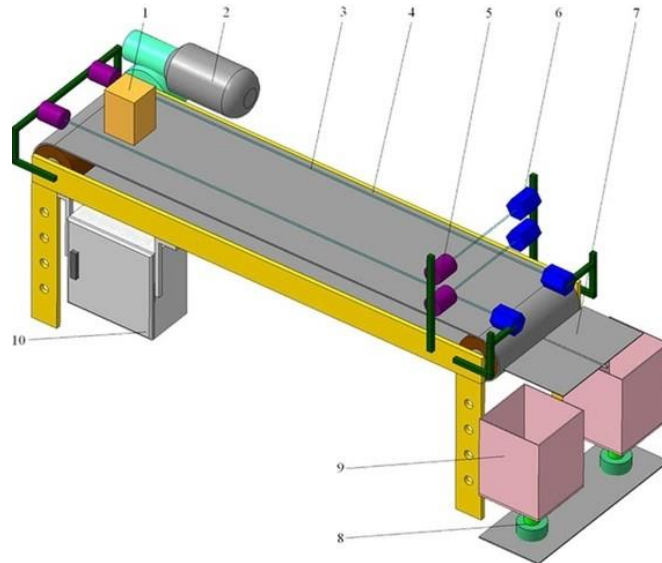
Physical model of the conveyor: 1-transported cargo; 2-asynchronous electric motor; 3-light beam; 4-belt; 5-light source; 6-optosensor; 7 – guide turntable for lowering loads into baskets 9; 8-motion sensors for measuring the weight of loads; 9-receiving stations cargo collection baskets; 10-power cabinet with electrical equipment
